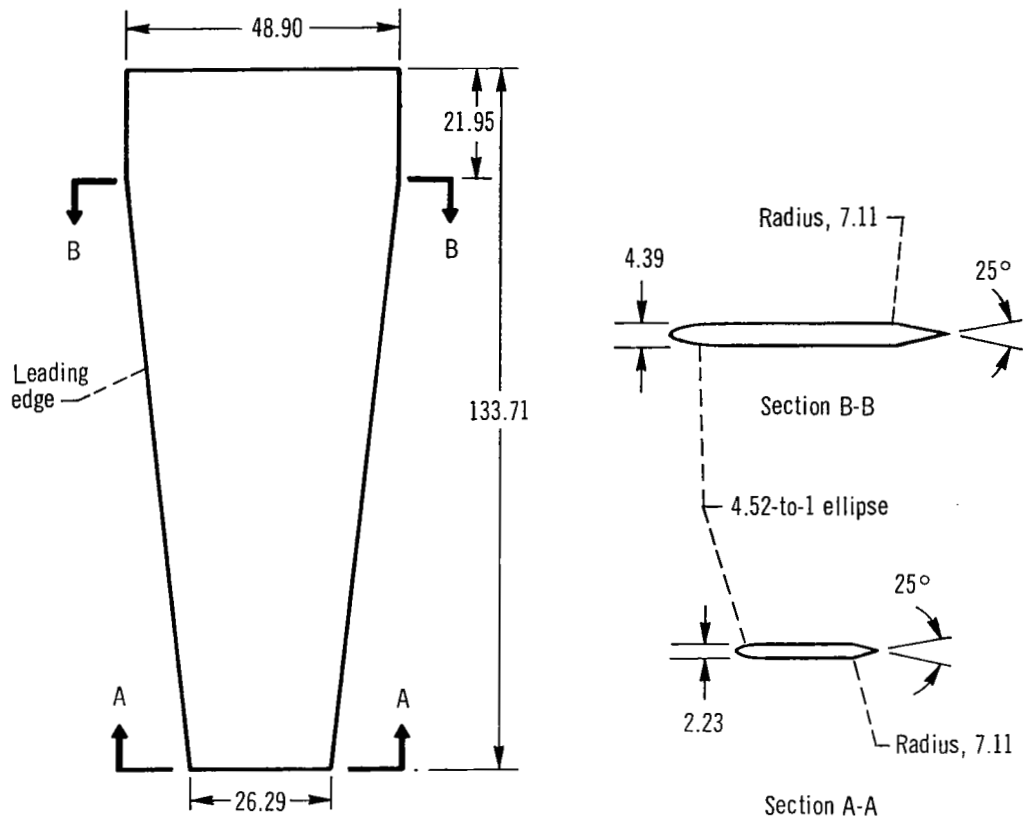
Details of wing. (All dimensions are in cm unless indicated otherwise.)
